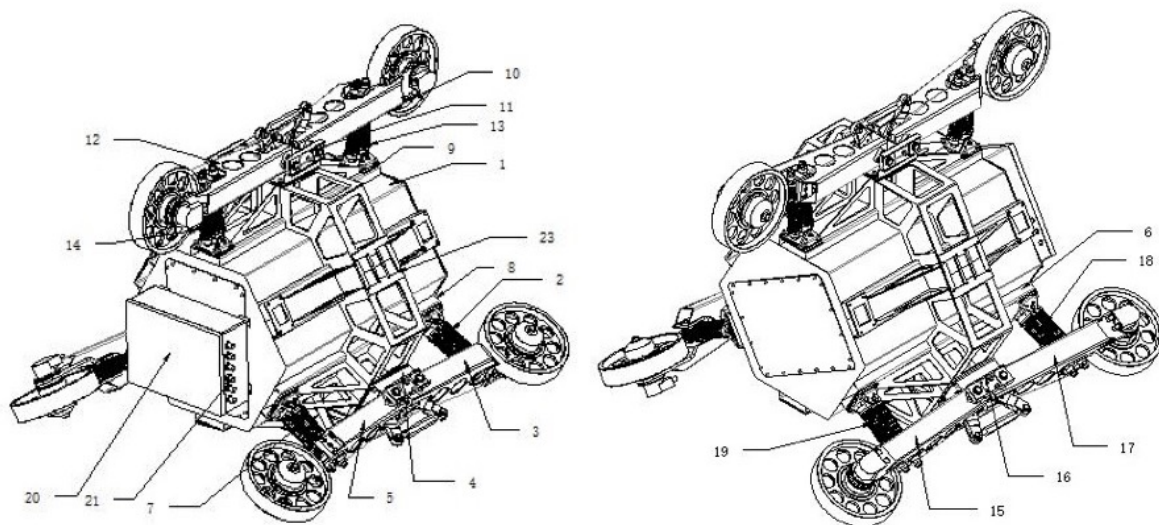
Previous design of oil pipeline inspection robot: (1) power box; (2) spring mechanism No. 1; (3) motion component No. 1; (4) connection component No. 1; (5) motion component No. 2; (6) fixture No. 3; (7) spring mechanism No. 2; (8) fixture No. 1; (9) fixture No. 2; (10) motion component No. 3; (11) connection component No. 2; (12) motion component No. 4; (13) spring mechanism No. 3; (14) spring mechanism No. 4; (15) motion component No. 5; (16) connection component No. 3; (17) motion component No. 6; (18) spring mechanism No. 6; (19) spring mechanism No. 5; (20) control box; (21) waterproof charging connector; (22) battery; (23) chassis.
